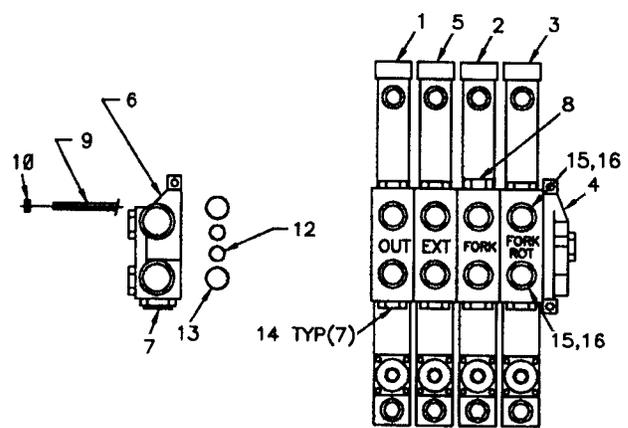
VALVE BANK ASSEMBLY (51706605)
